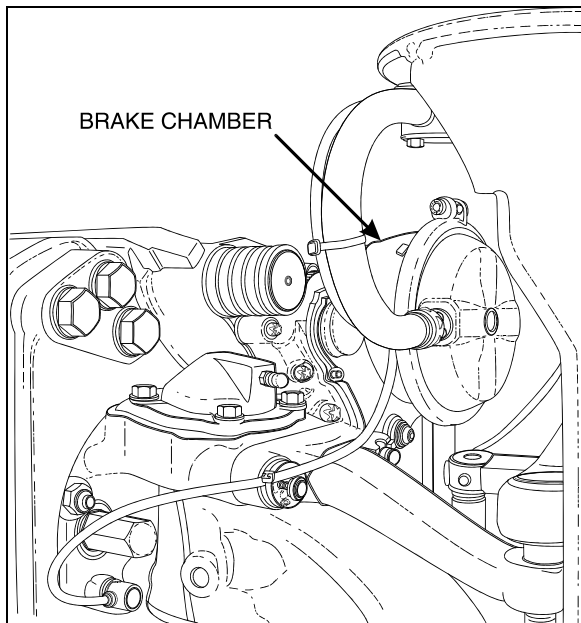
FRONT AXLE BRAKE AIR CHAMBER 12158
